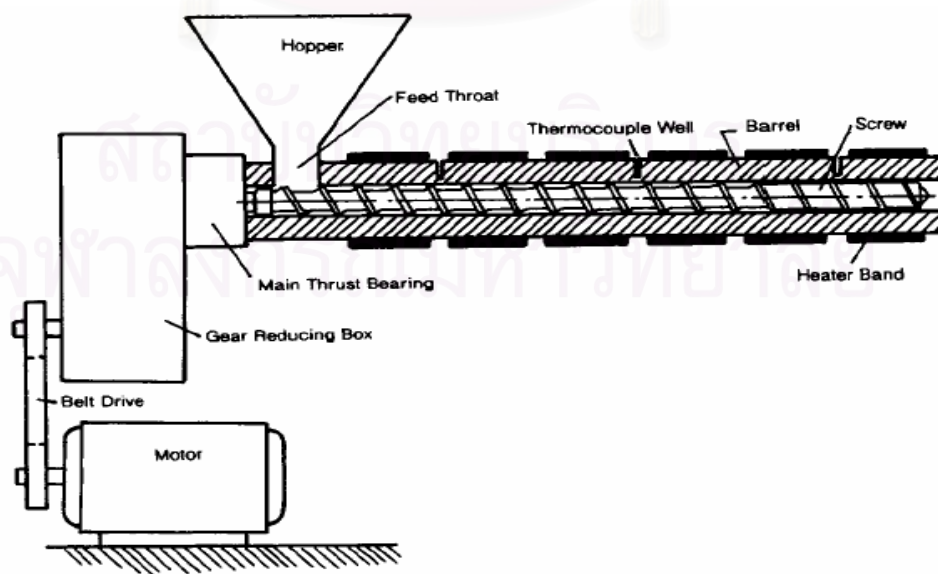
Schematic of conventional single screw extruder without extrusion die(8)
